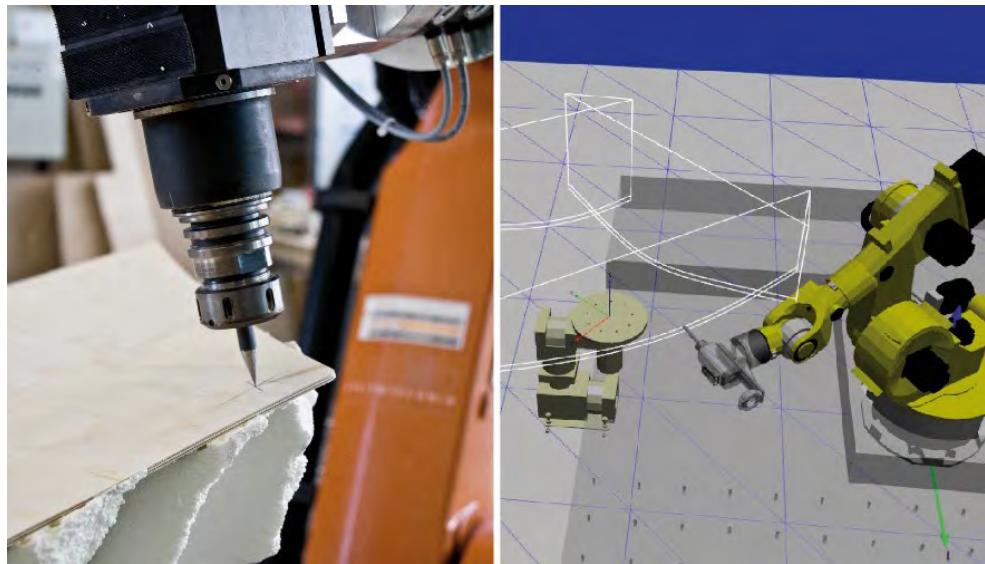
Adaptive robotic manufacturing. Left: a measuring tool is used on the robot to scan the cone module within the robotic manufacturing setup. Right: the robot code is adapted to the actual location of the cone module (Image by ICD University of Stuttgart).
